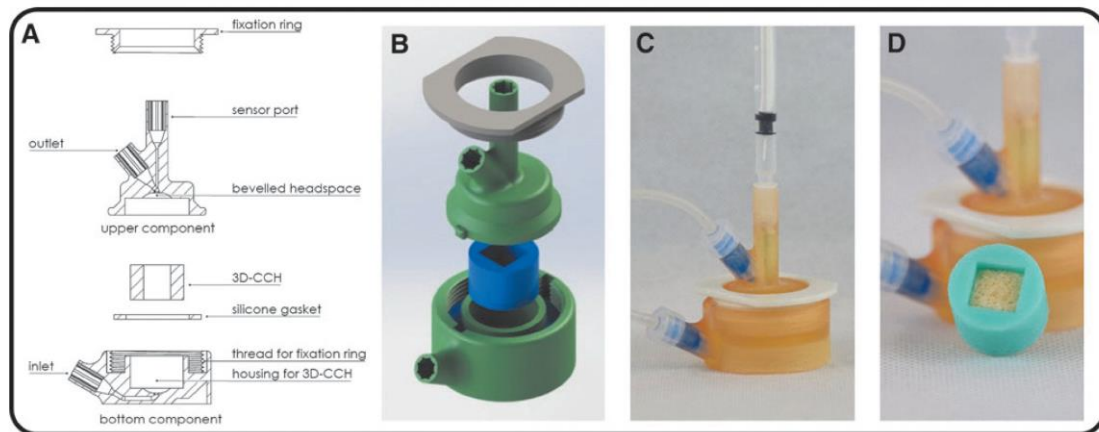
3D-printed microreactor for 3D cell culture. (A) Sectional drawing. (B) Explosion drawing. (C) Assembled with inlet/outlet/sensor. (D) Cubic bovine bone matrix scaffold in 3D-CCH. 3D, three dimensional; CCH, cell culture housing.
